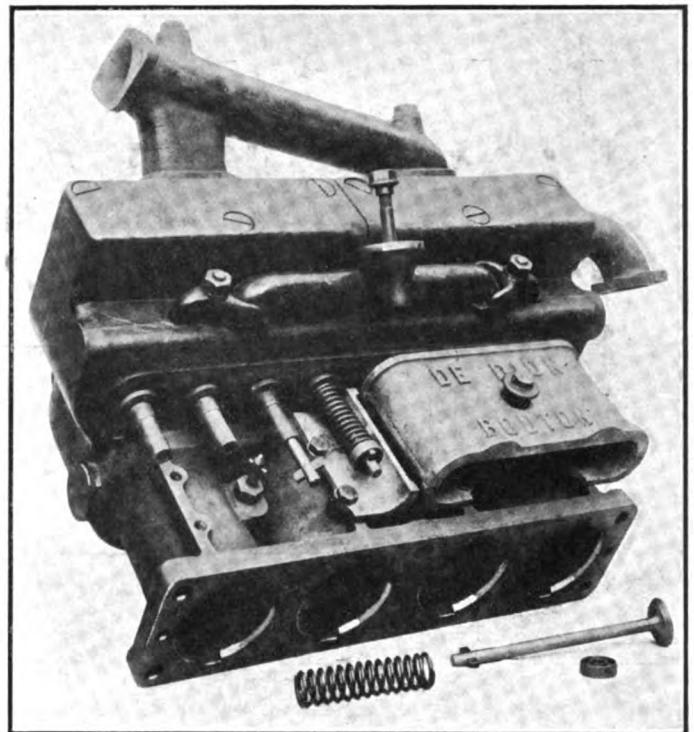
Right cylinder block with the valves partially removed. The water piping and intake and exhaust manifold are clearly shown
